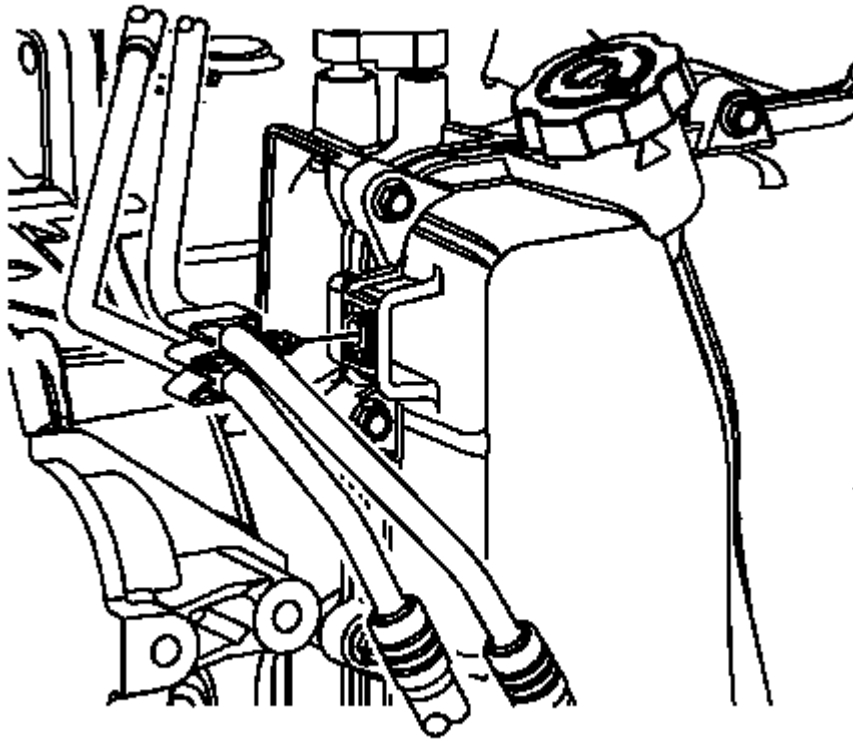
Identifying Oil Cooler Inlet And Outlet Hoses
